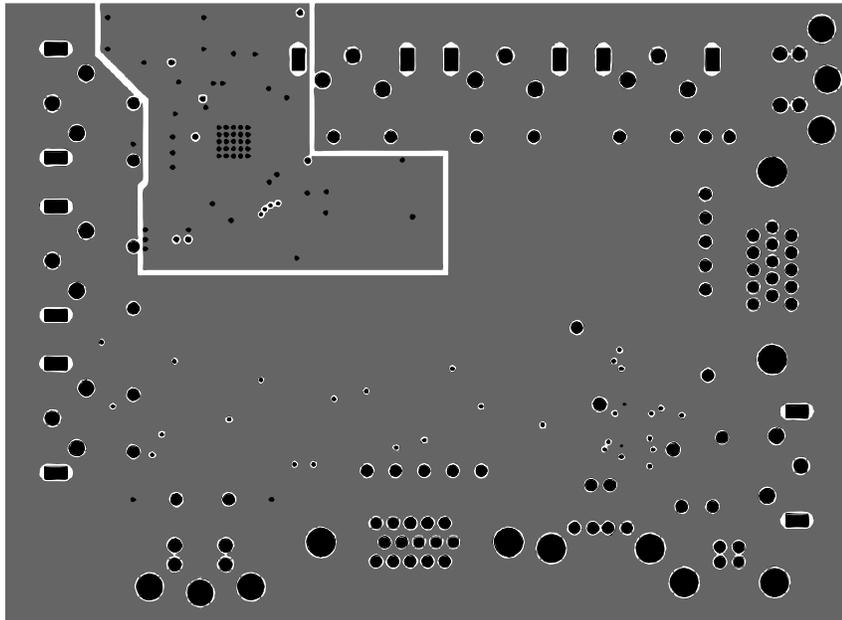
PCB Drawing, Layer 1 (Top Layer)
